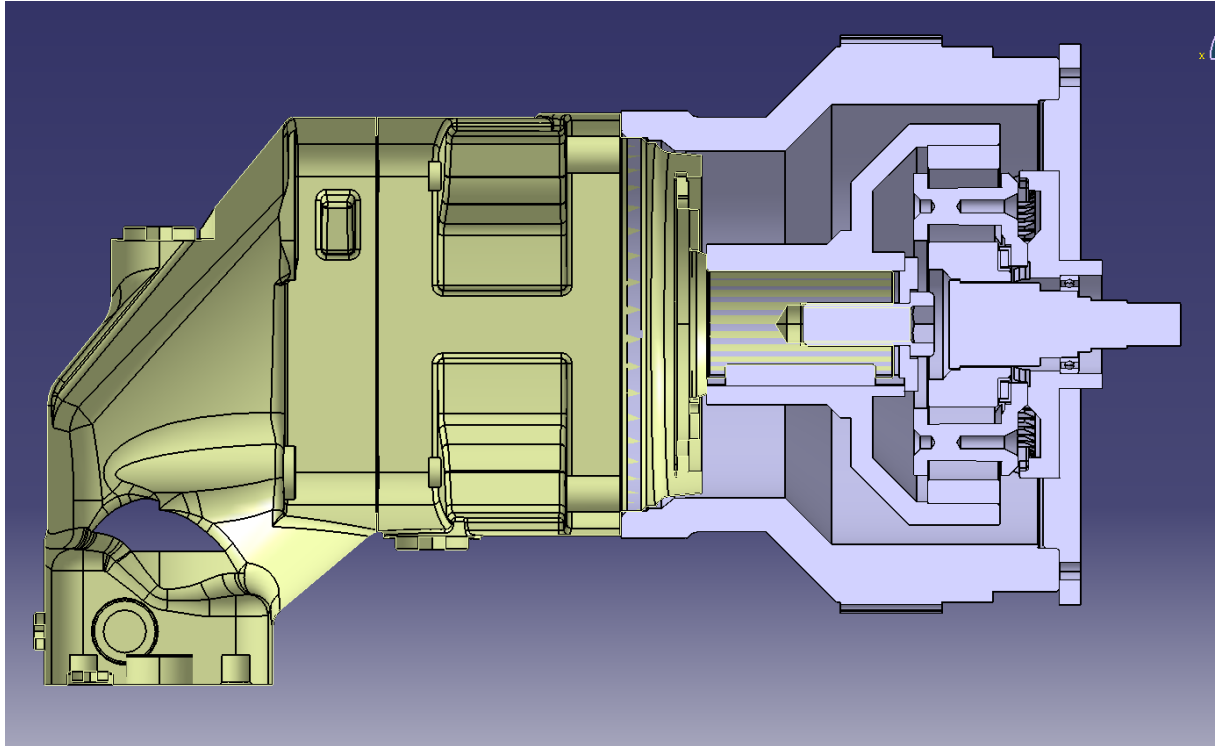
A cross section view of the planned assembly, *David Svetlik, 2017
